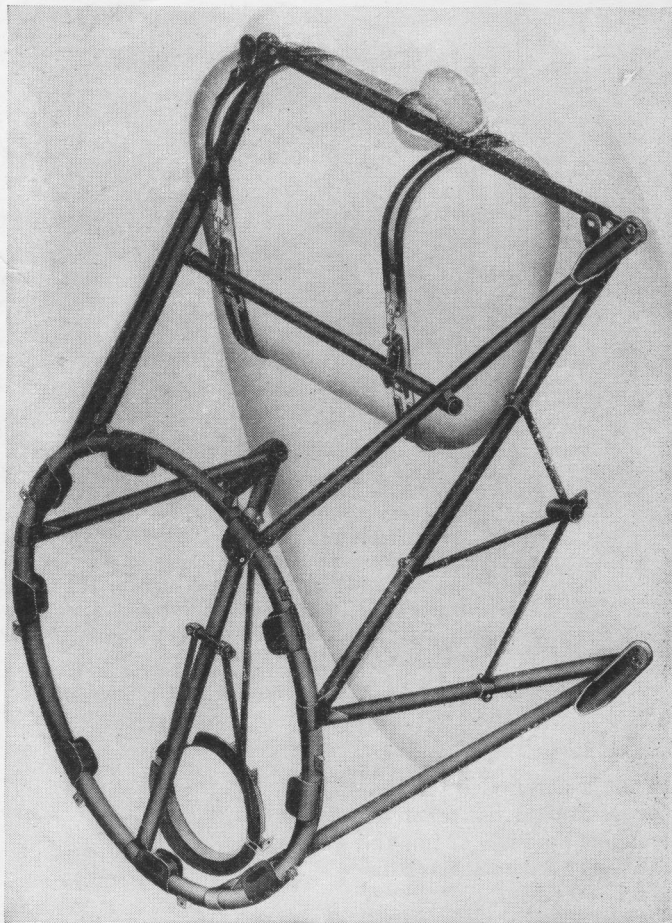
The engine mount is attached to the fuselage by four $\frac{1}{2}$ -in. drilled-head bolts. The detail drawing shows the position of conical aligning studs for lining up the boltholes when attaching the mount. The engine can be detached with or without the mount.
